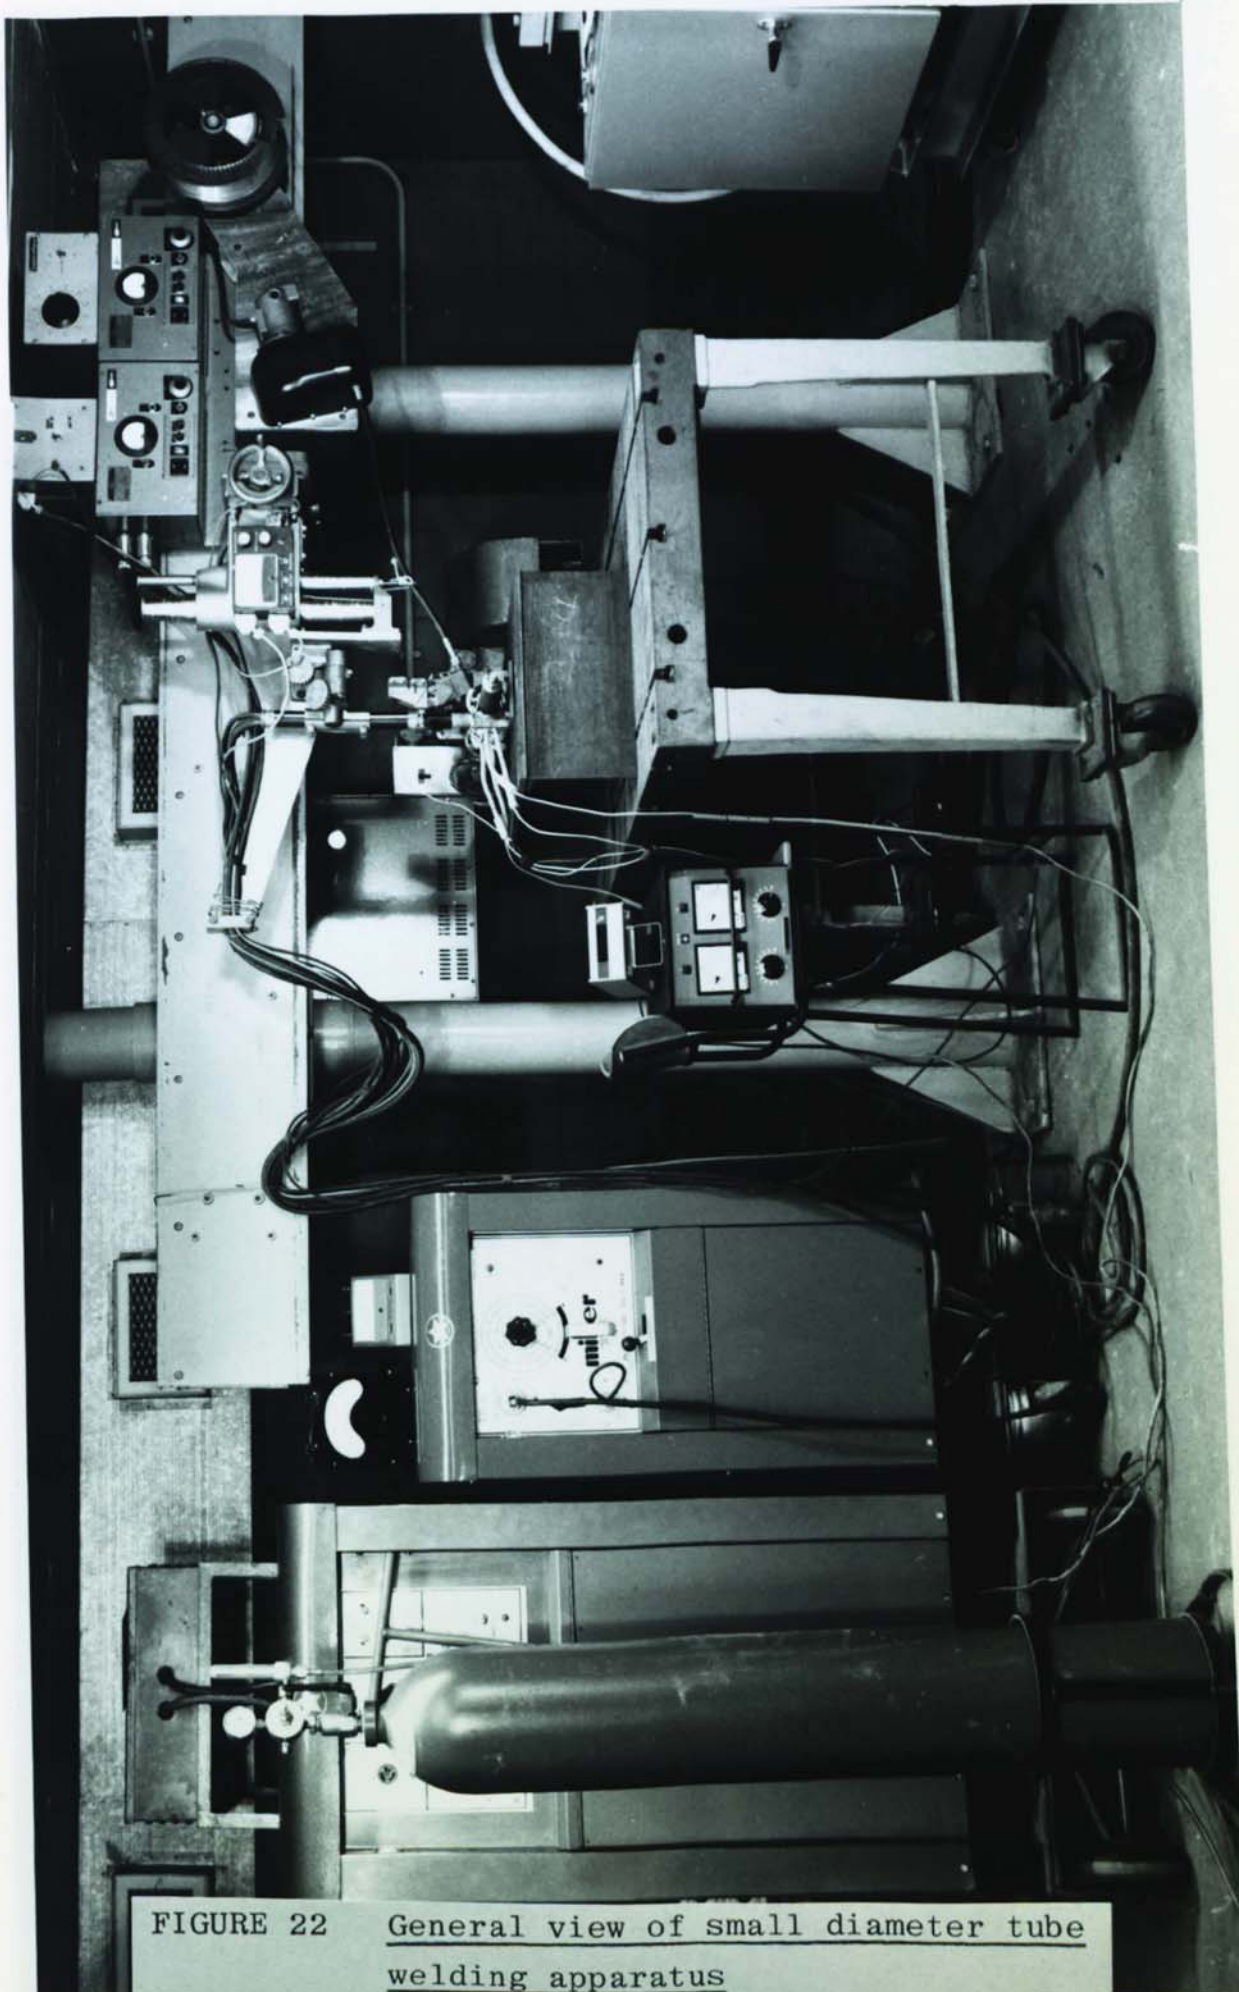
General view of small diameter tube welding apparatus
